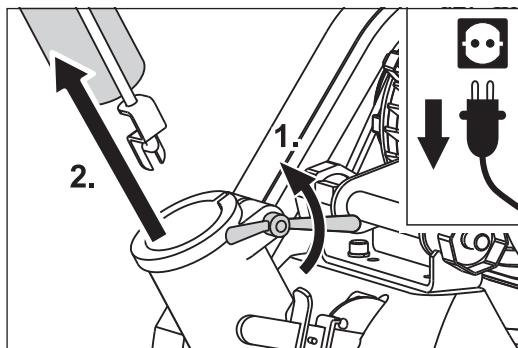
Open the wing nut (1.) and pull the guide tube out of the machine housing (2.).
